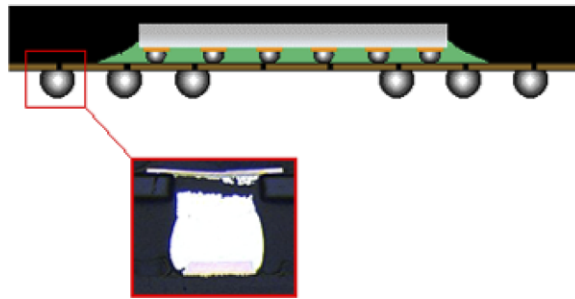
Cross-section of a ball grid array and a failed corner solder bump, courtesy of Dr. JWC. de Vries, Philips Applied Technologies.
